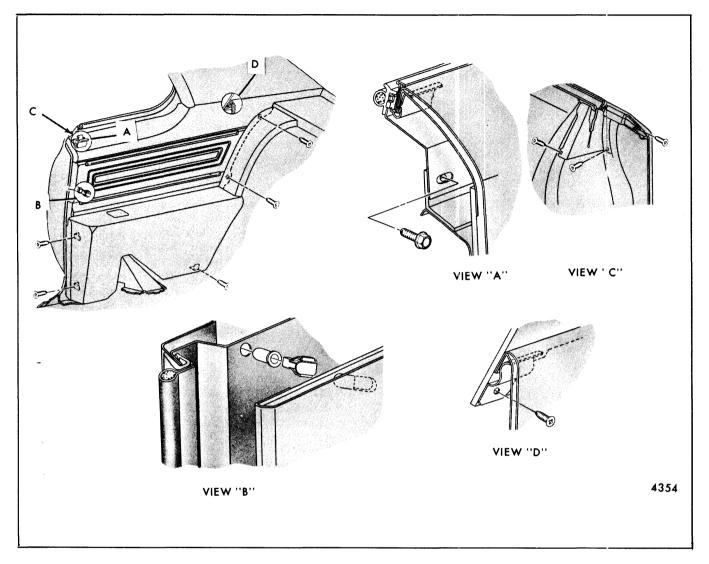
Quarter Trim Assembly Attachment - Two-Door Hardtop Styles ("B" Style Shown)
